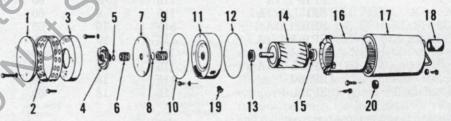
Exploded view of SP3 series submersible pumps.
